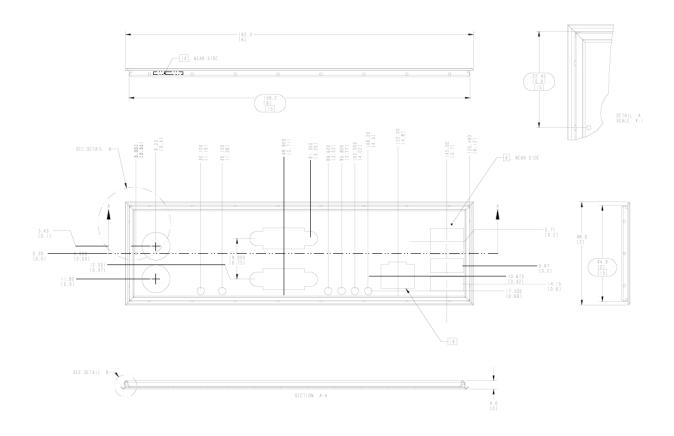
Pedestal Mount I/O Shield Mechanical Drawing for Intel<sup>®</sup> Server Boards S3200SH-L/S3210SH-LX
